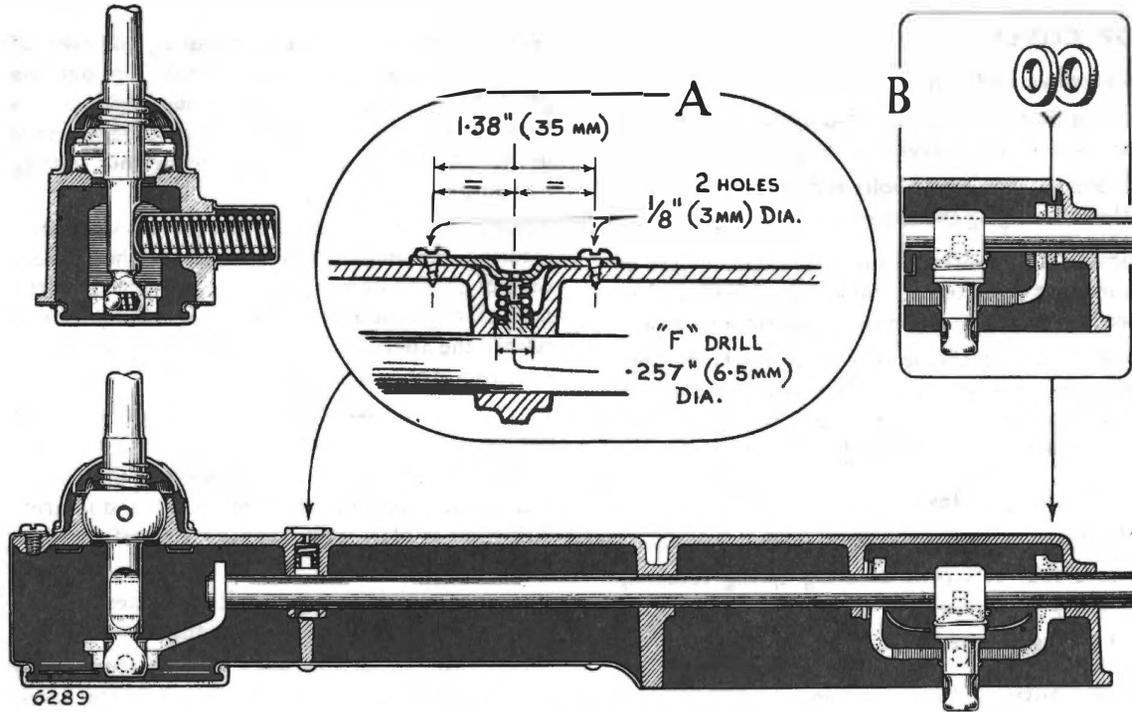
Sectional view of top cover assembly, early Alpine cars
